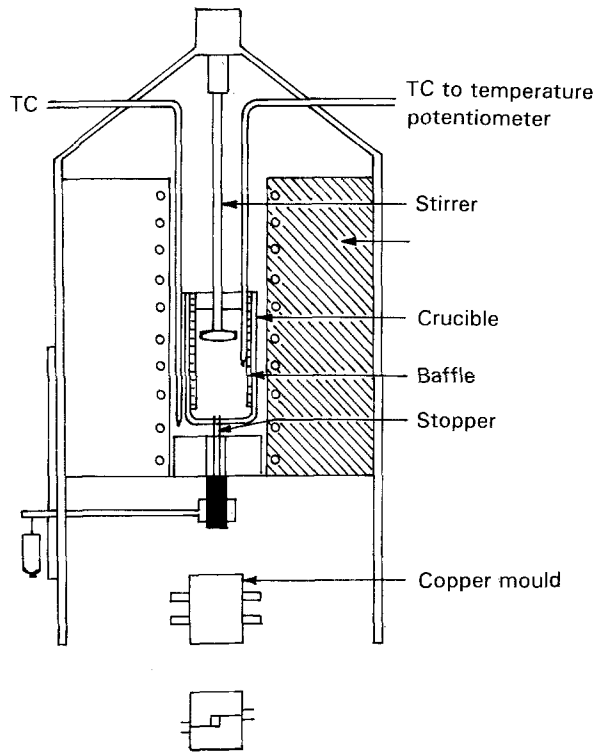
Schematic drawing of apparatus used for stir-casting and comocasting processes. ITC, thermocouple.
